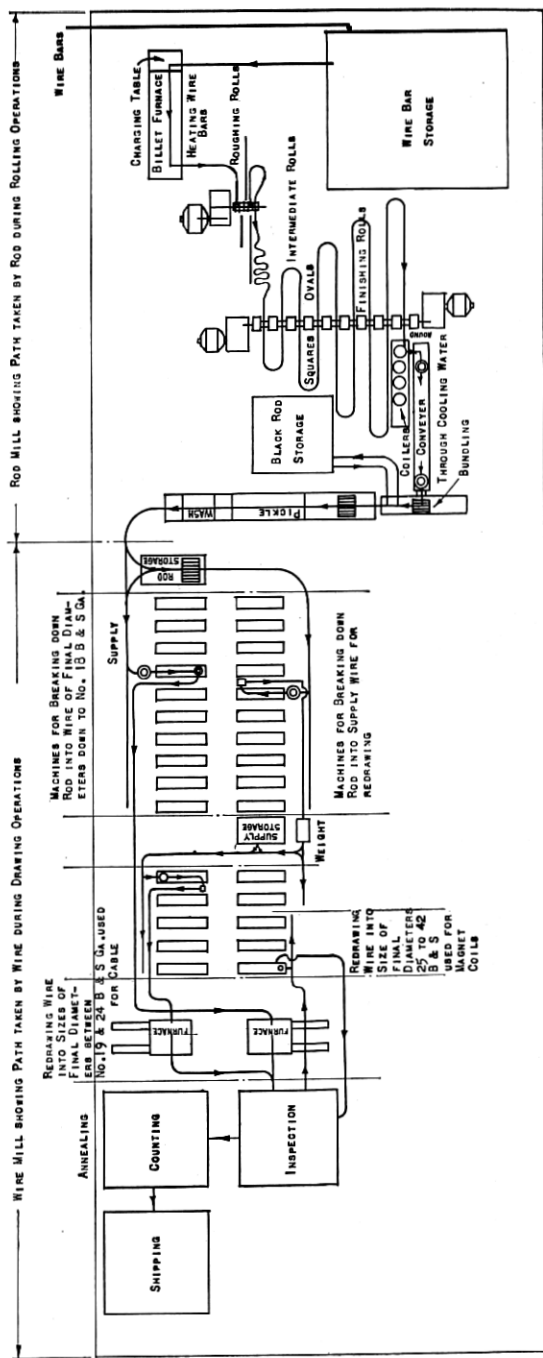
Schematic layout of Western Electric Company's copper rod and wire mill at Chicago, Ill.
